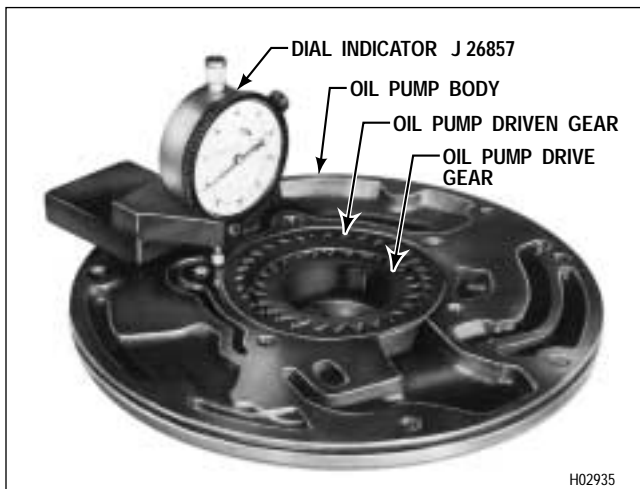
Zero Dial Indicator on Oil Pump Body Surface
